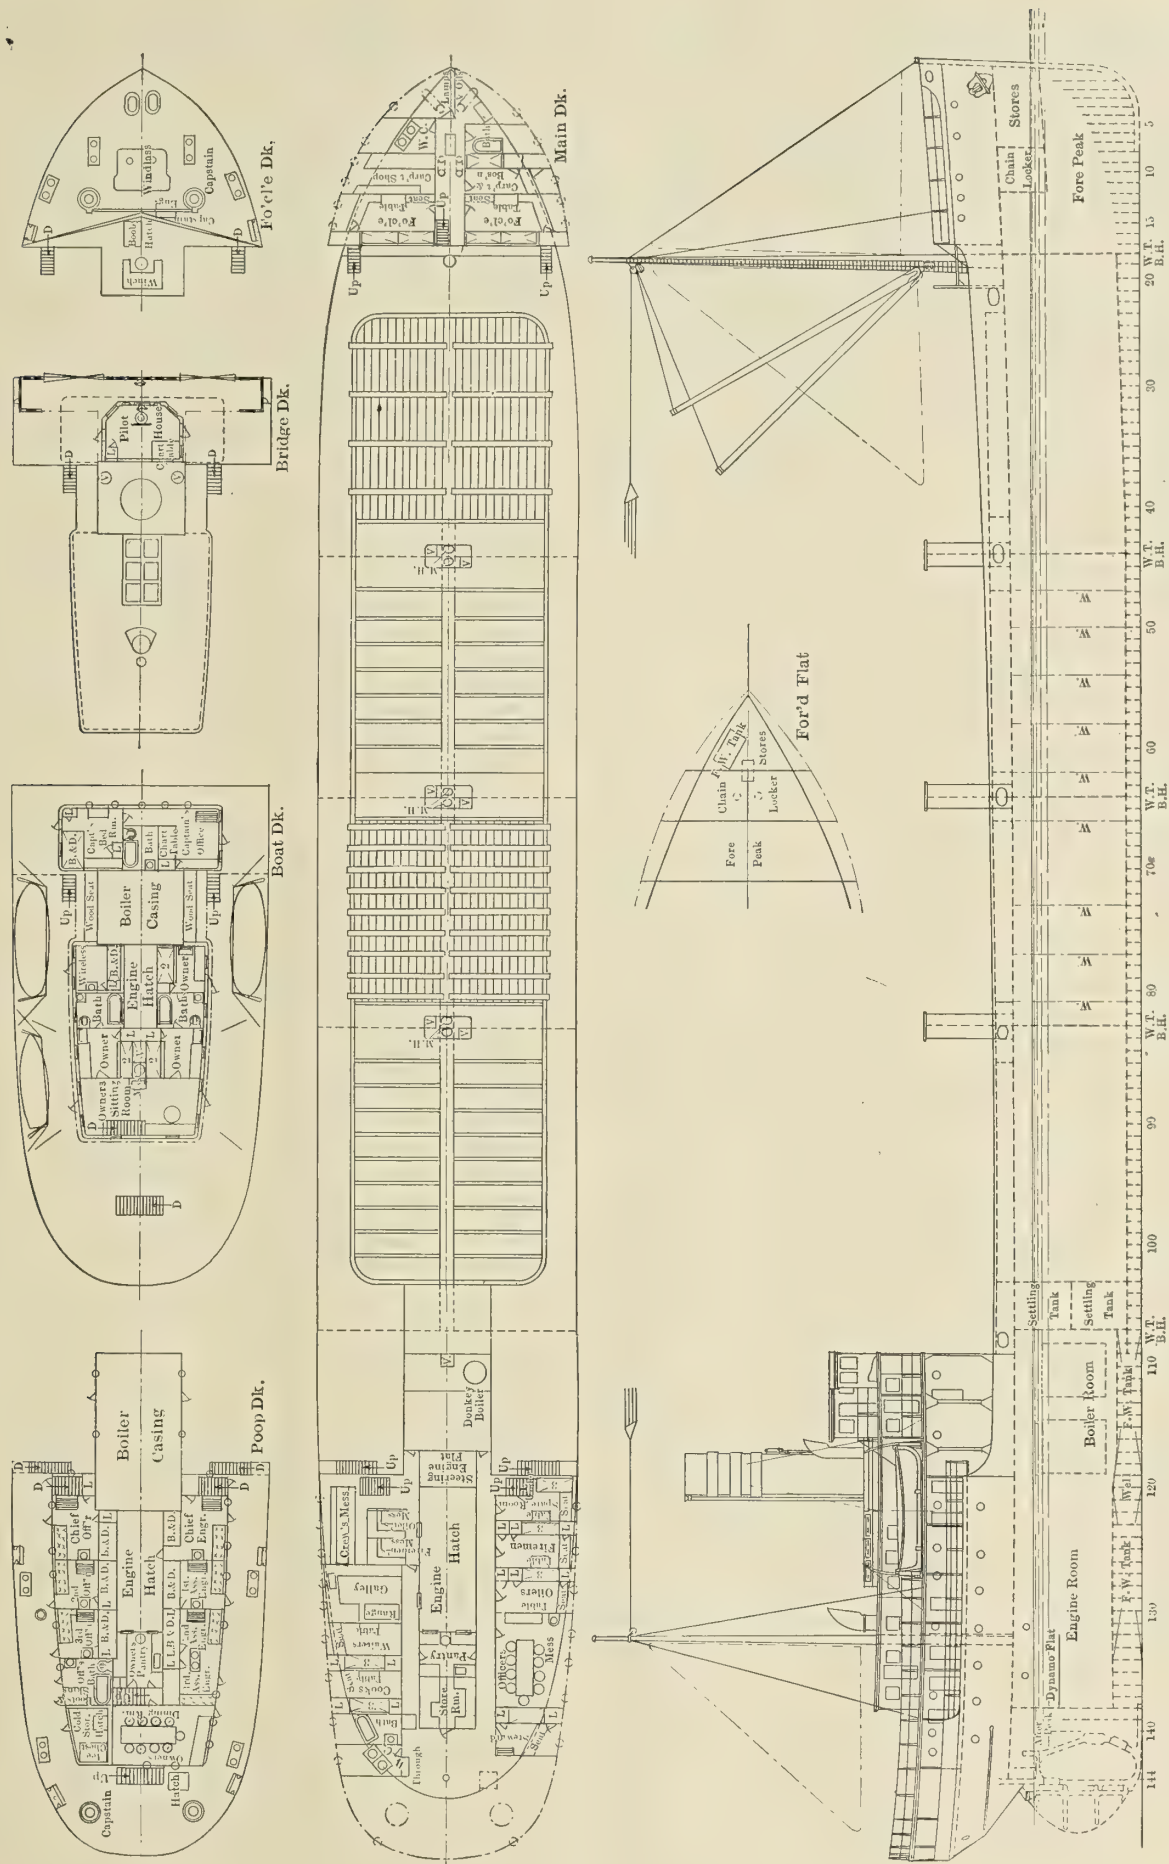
GENERAL ARRANGEMENT PLANS OF LUMBER STEAMER BUILT ACCORDING TO HOUGH'S PATENT CENTER-TRUNK CONSTRUCTION
